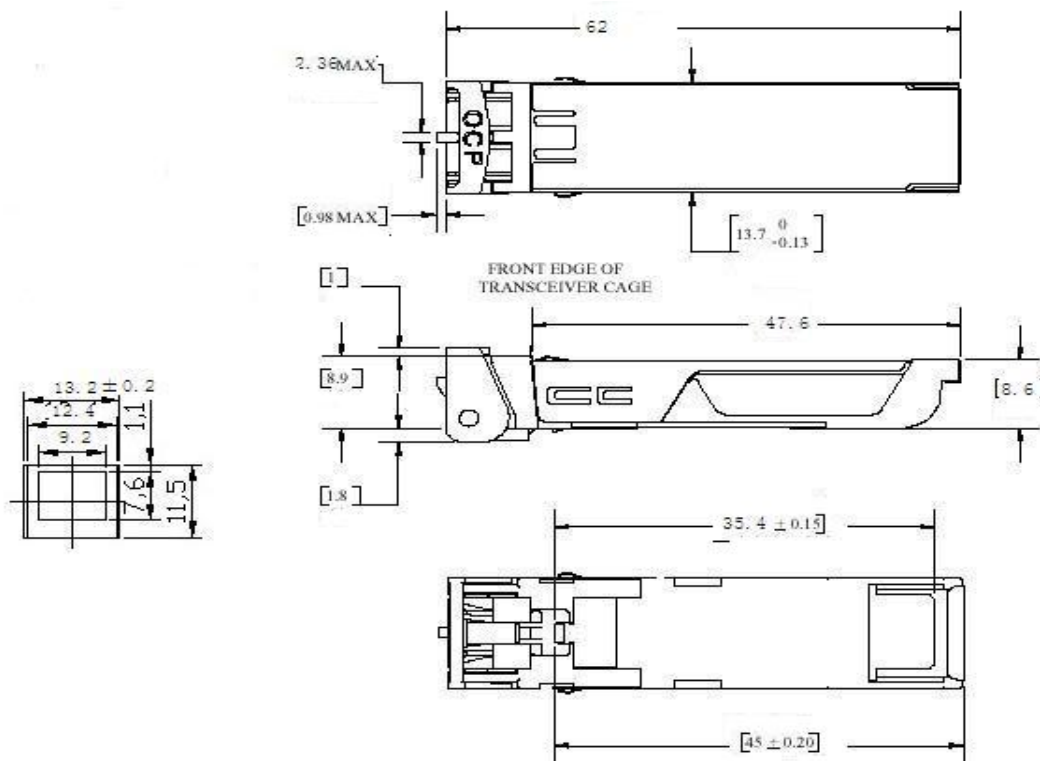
, Mechanical Design Diagram of the SFP with Spring-Latch
